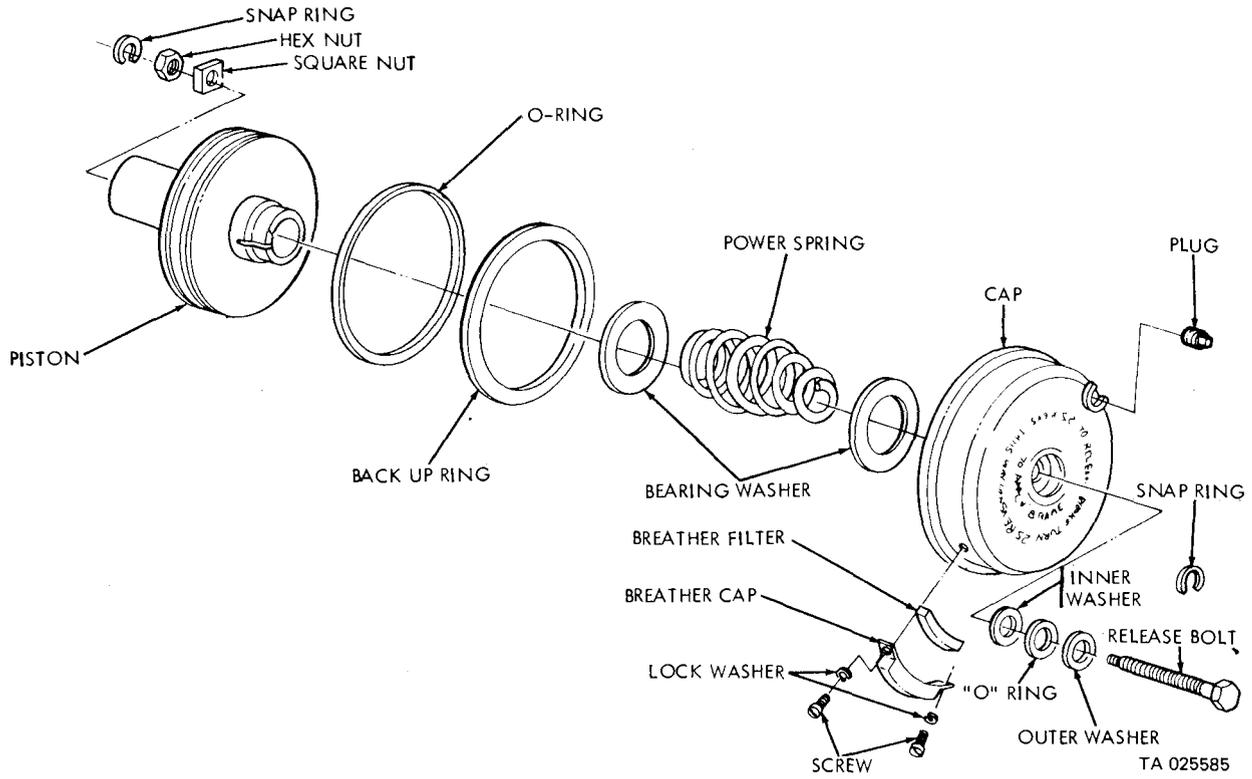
Fail-safe chamber cap assembly (semitrailer No. 1 thru 200 )
